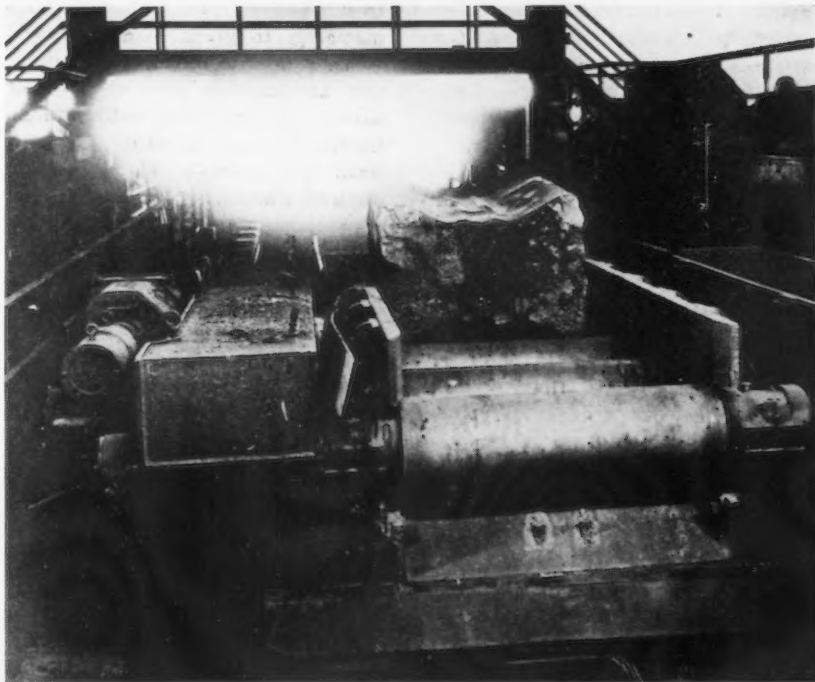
11-ton capacity ingot transfer car, operated by remote control in a Chicago blooming mill. Car by Wheeling Mould & Foundry Co.; electrical equipment by Westinghouse.
